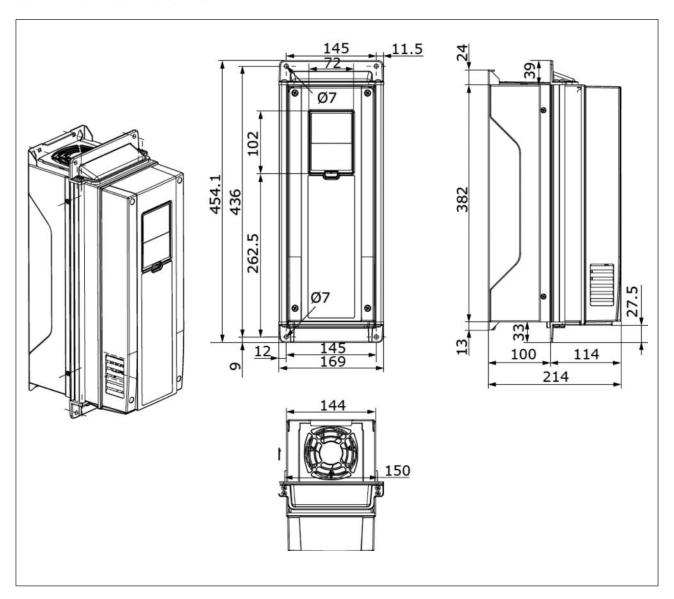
The dimensions of the AC drive, flange mounting, MR5
